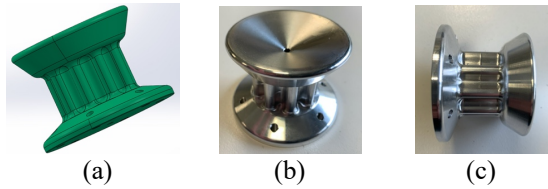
(a) Modified Passive I/F for manufacturing at one block, (b) and (c) Metallic Passive I/F, manufactured as one piece.
